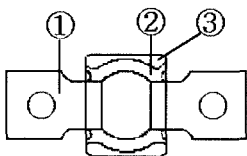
Construction of the oil damper bush: 1: stem, 2: rubber, 3: eye.
